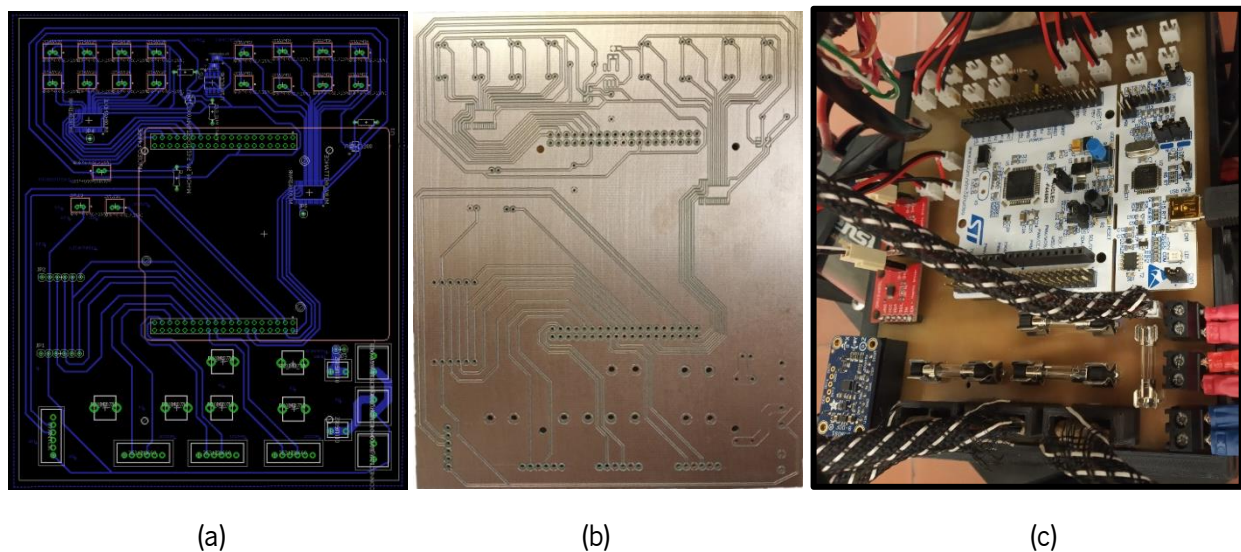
(a) PCB layout with EAGLE software; (b) PCB of the cane (horizontally mirrored); (c) PCB with implemented ARcane components.
